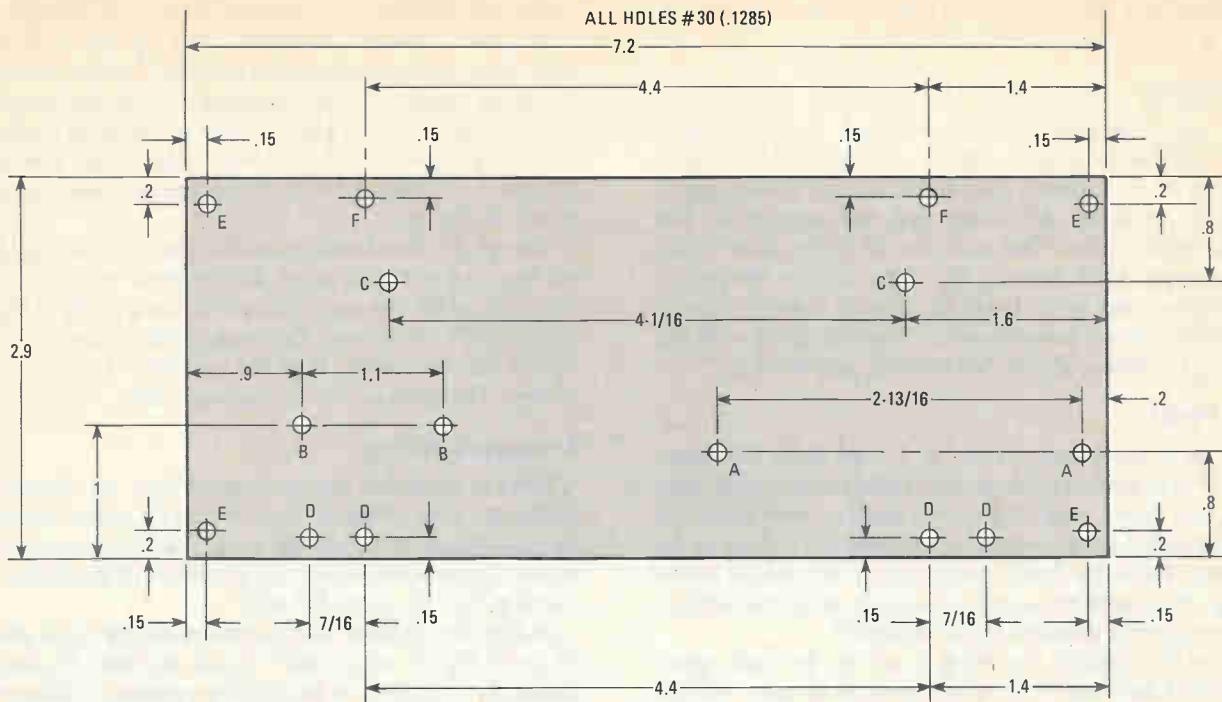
BASE PLATE detailed diagram used to mount the outside surfaces and some parts of Kerber Klock III. Dimensions are in inches.
